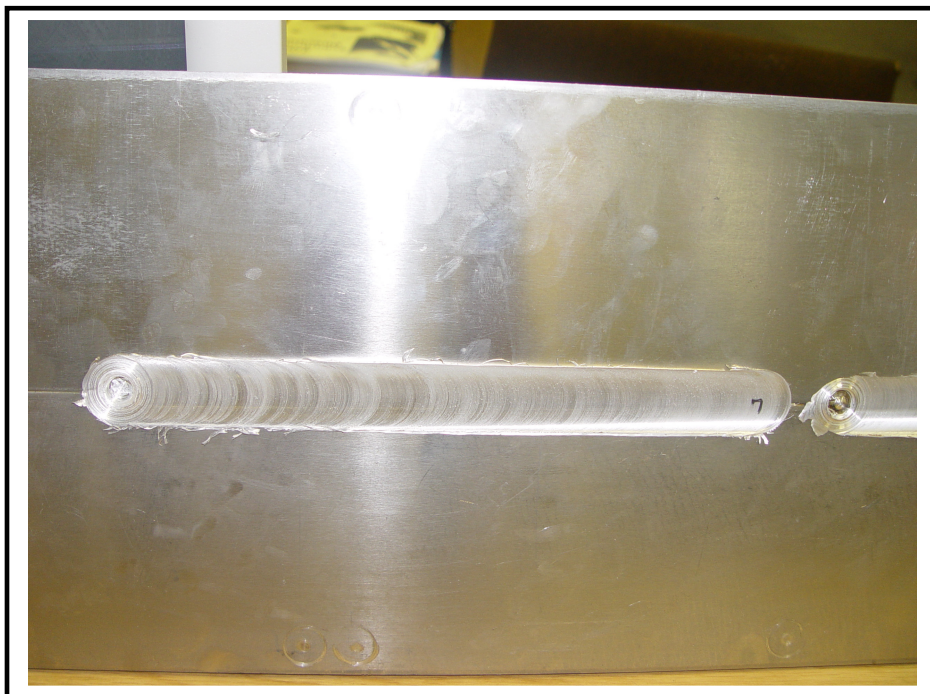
FSW-weld (5083 alloy and Tool 1).
